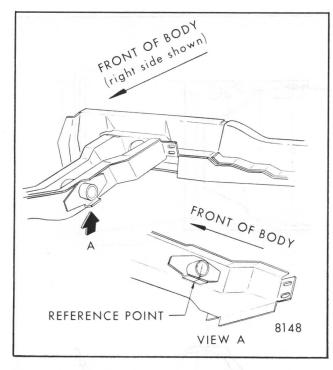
Side Rail at Rear Spring Rear Shackle Bushing - "X" Bodies
